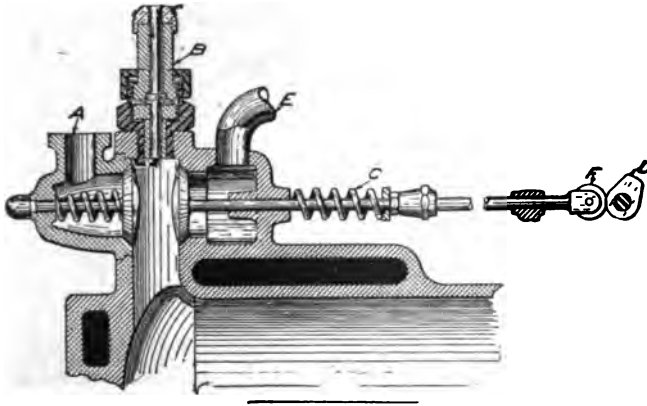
Detail Diagram of the Valves and Attachments of a Gas Engine Cylinder. A is the inlet port behind inlet valve held in its seat by a tension spring; B, the spark plug for "jump-spark" ignition; C, the push rod and compression spring of the exhaust valve; D, the cam opening the exhaust; E, the exhaust port; F, the roller at end of valve rod bearing on the cam, D.
